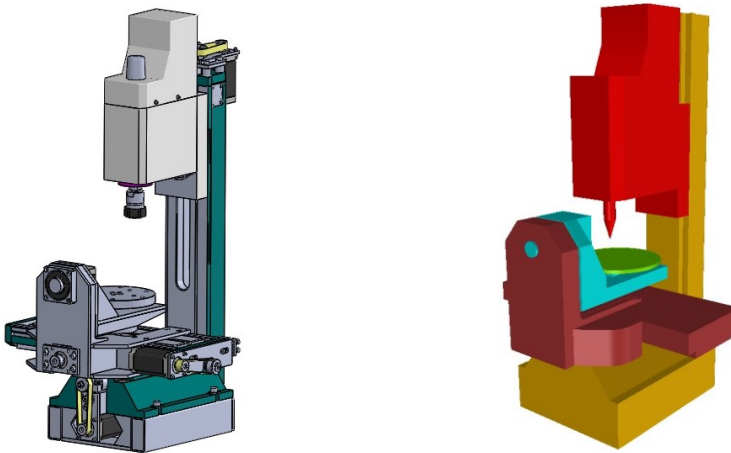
Original (left) and simplified (right) CAD model of the five-axis machine presented in this thesis
